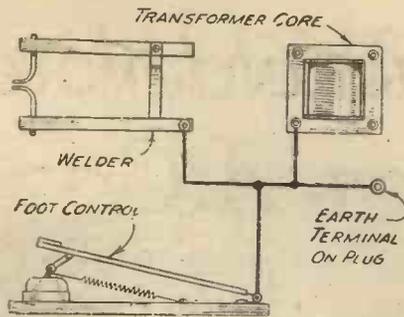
The connections for earthing the welder and the foot pedal.
